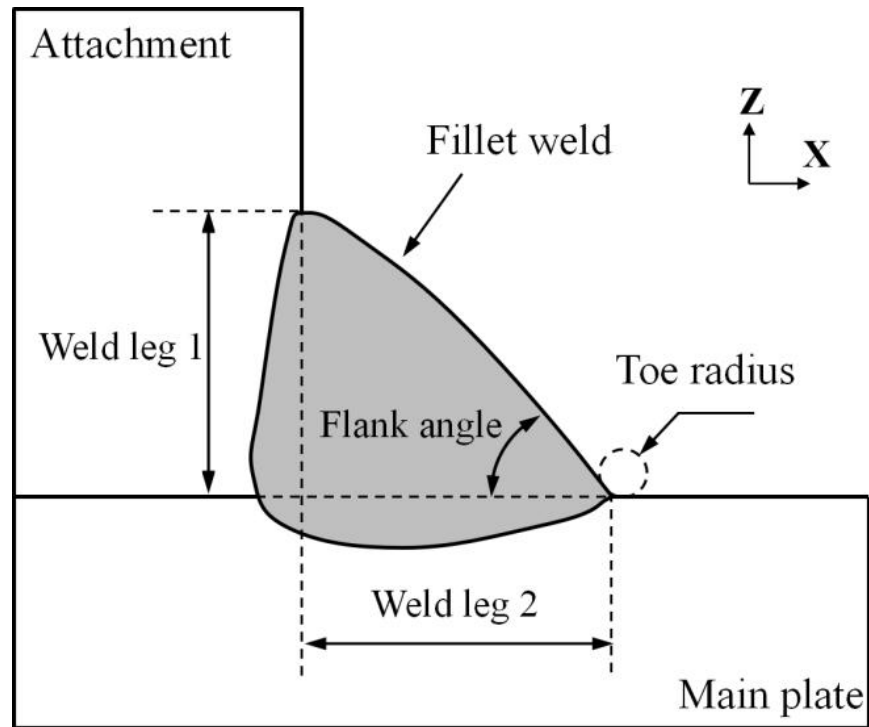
Fillet weld profiles and their geometry.
